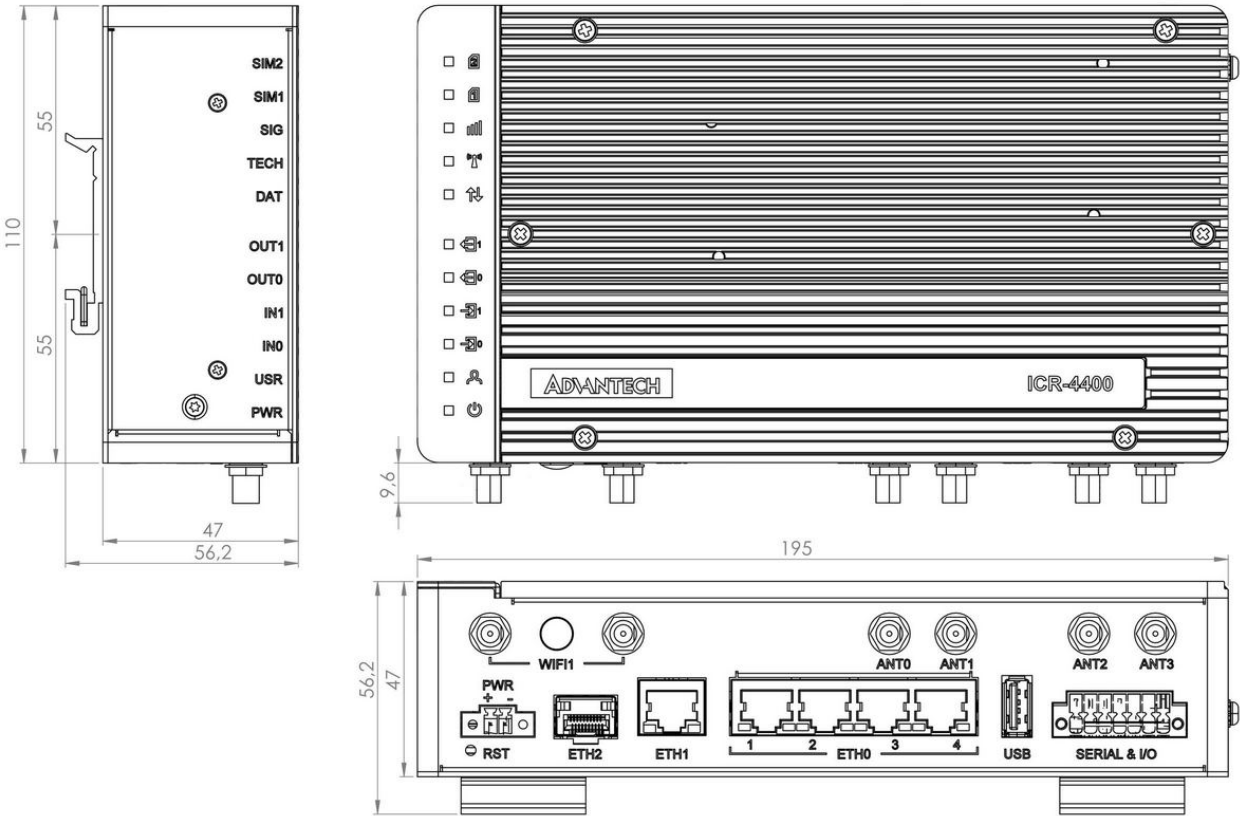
Router dimensions – front, top and right view with DIN rail clip
